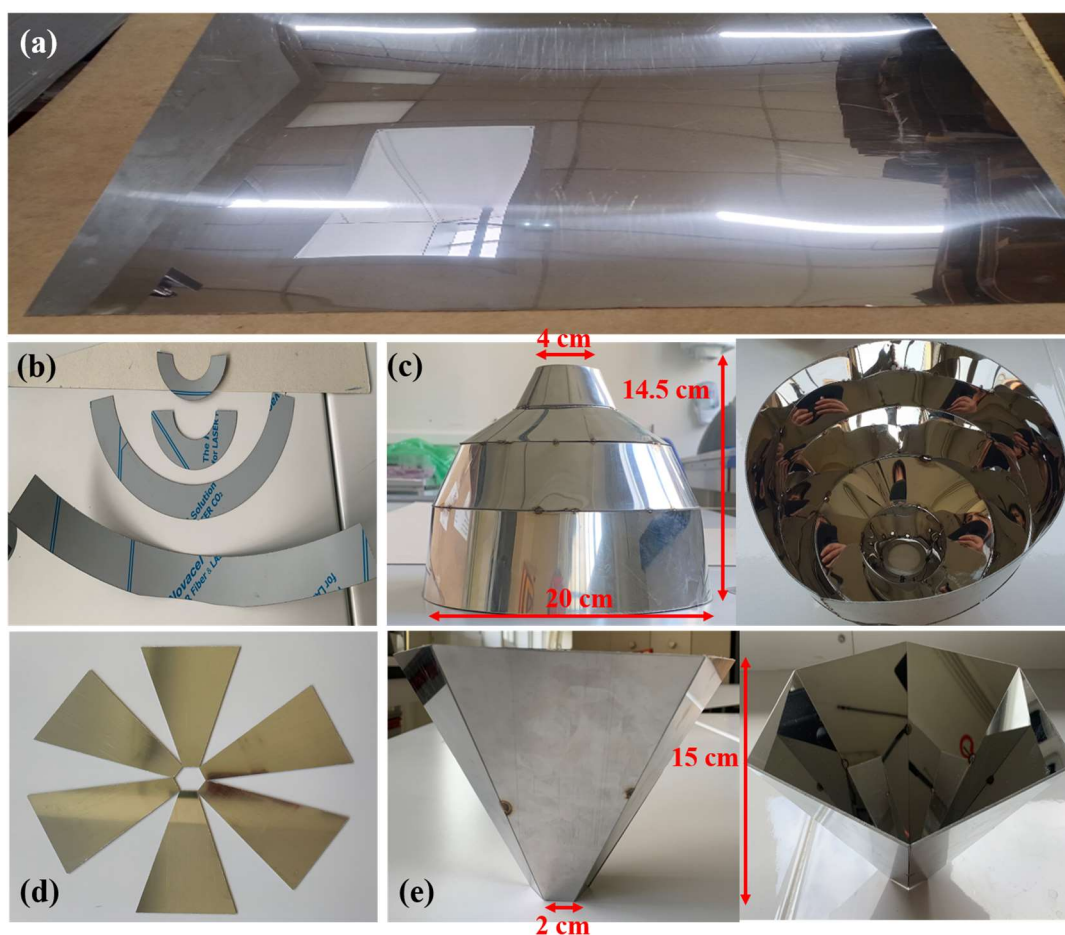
22 (a) Mirror-polished stainless steel plate; (b) Cut parts and (c) Assembled ellipsoidal reflector; (d) Cut parts and (e) Assembled secondary reflector
